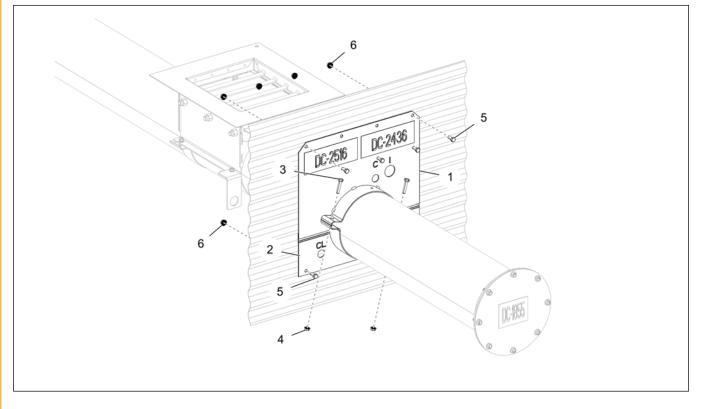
10" Bin flange parts (24' - 30' Bins)
